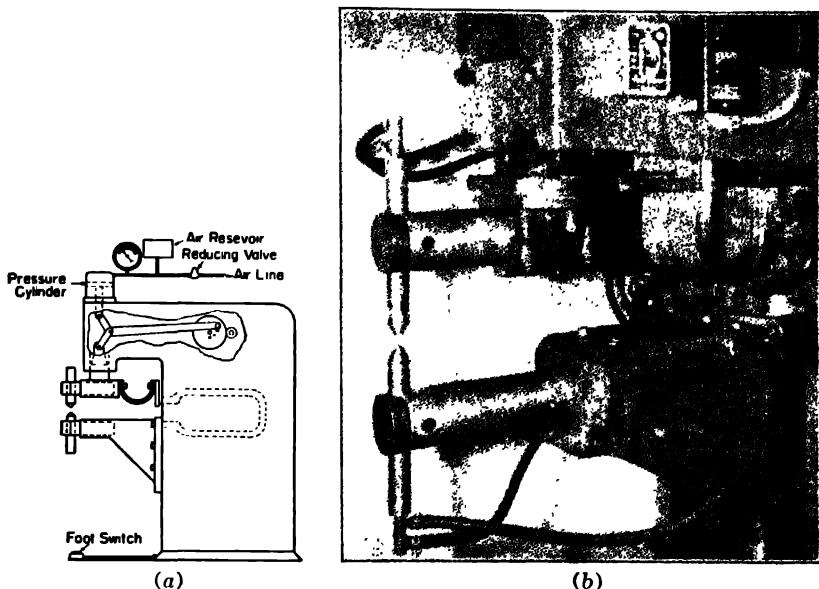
(a) Schematic diagram of a spot-welding press. (b) Photograph of water-cooled electrodes of spot welder.
